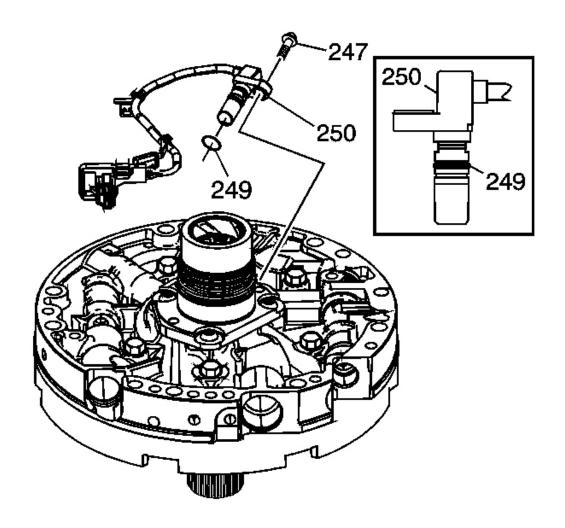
Identifying Input Speed Sensor (ISS) O-Ring Courtesy of GENERAL MOTORS CORP.
